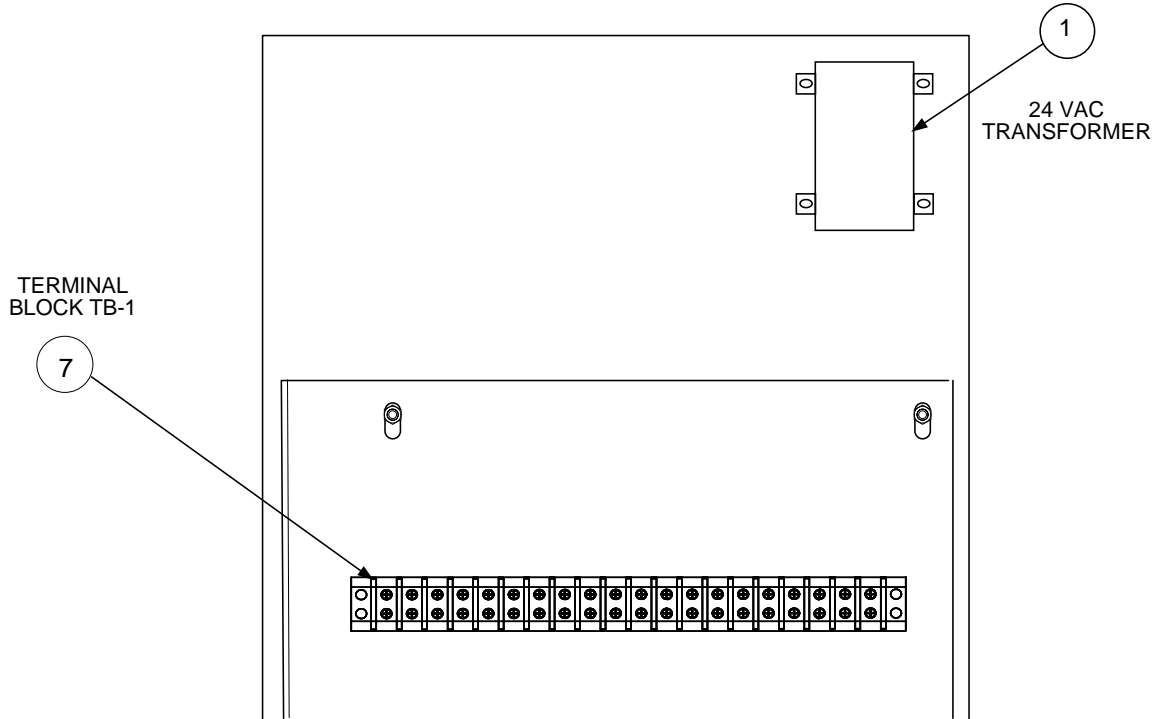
ECS/SP Control Box Assembly 69096 (Sheet 1 of 2)
